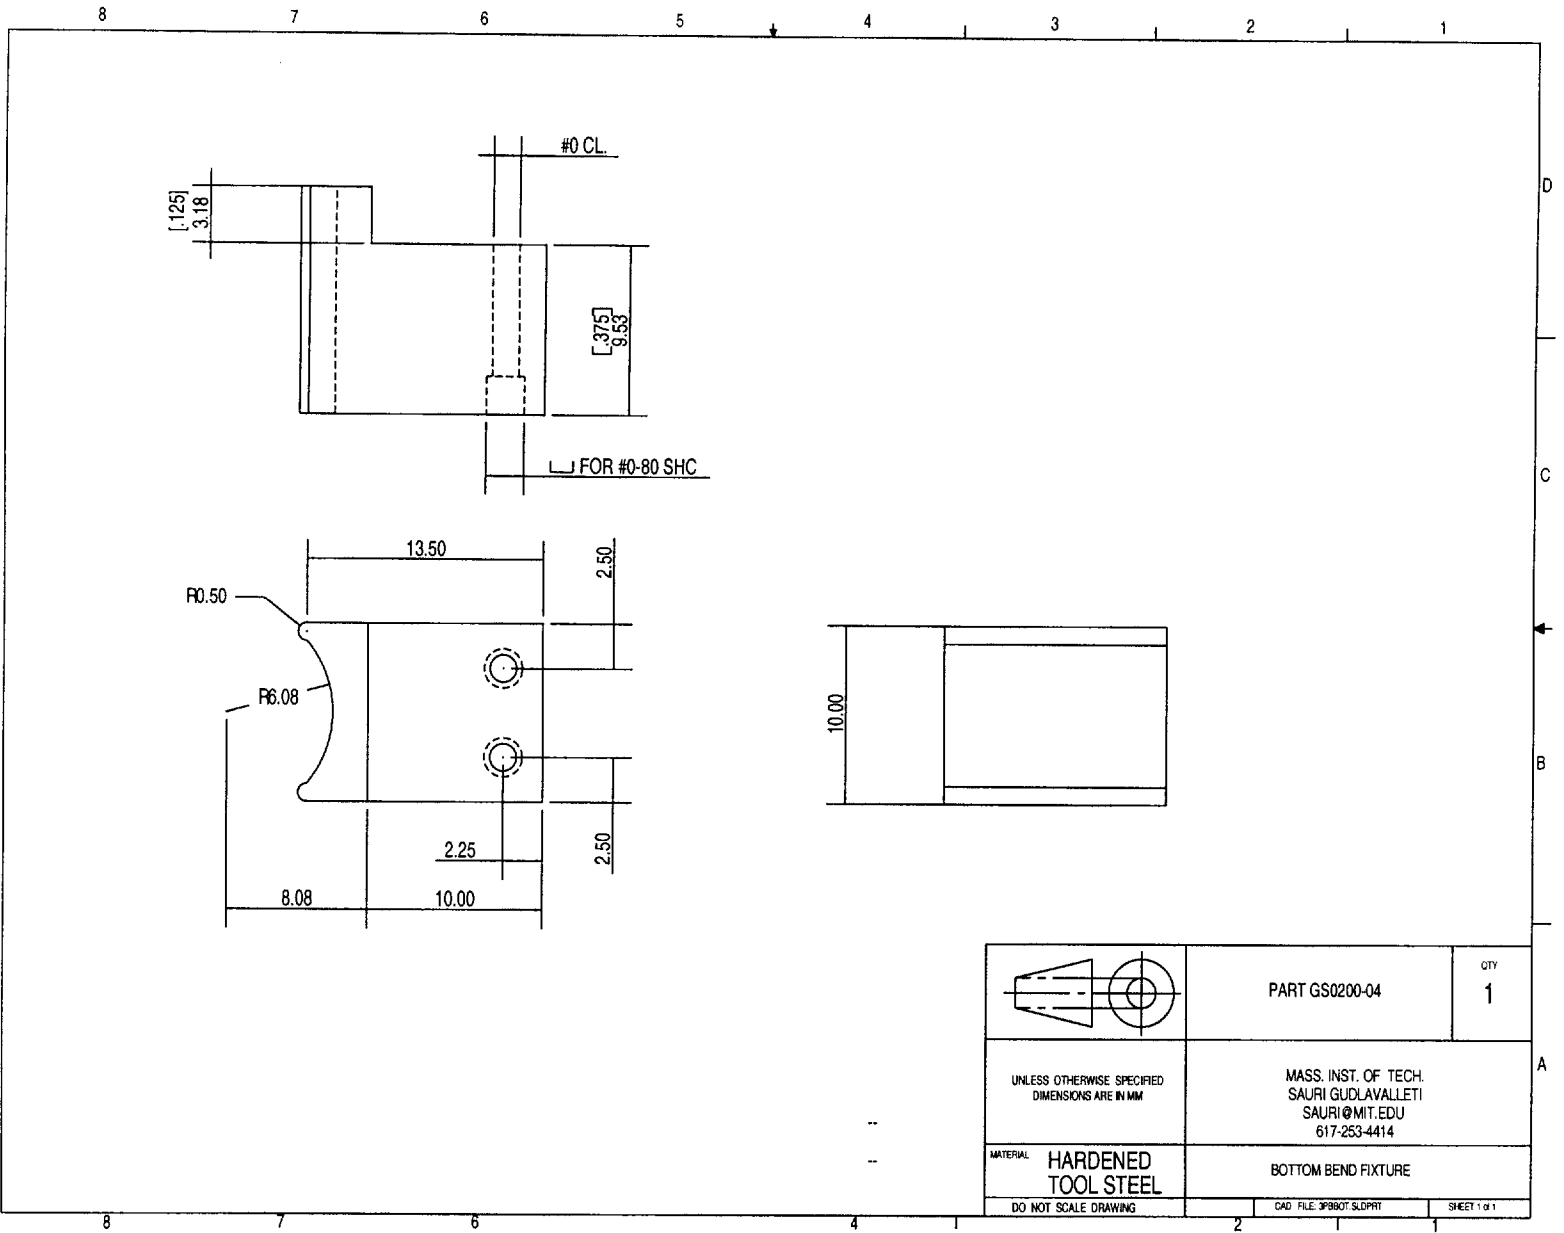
Part GS 0200-04. Bend testing fixture (bottom).
